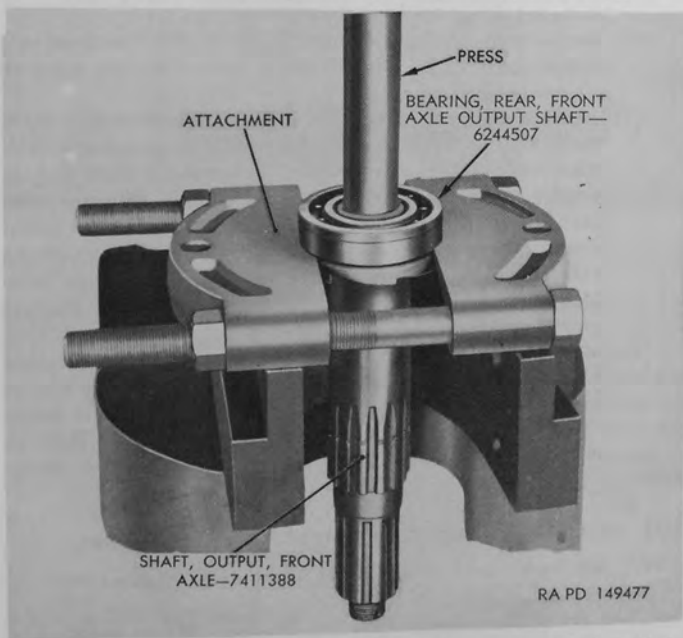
Removing rear bearing from front axle output shaft using attachment 41-A-345-328 (part of puller set 41-P-2905-60) and arbor press.
